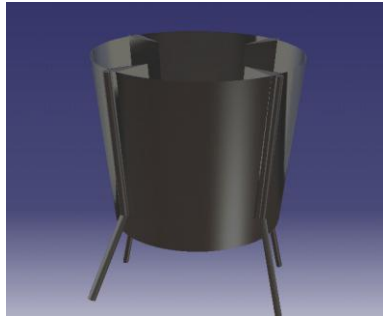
3D Drawing and Dimensions of Lacerating chamber
